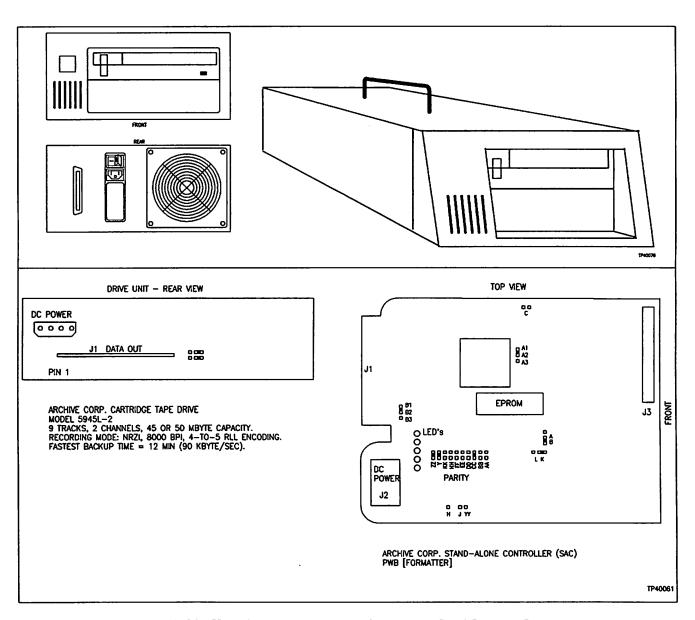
Tape Drive and Internal Controller Card Jumper Settings
